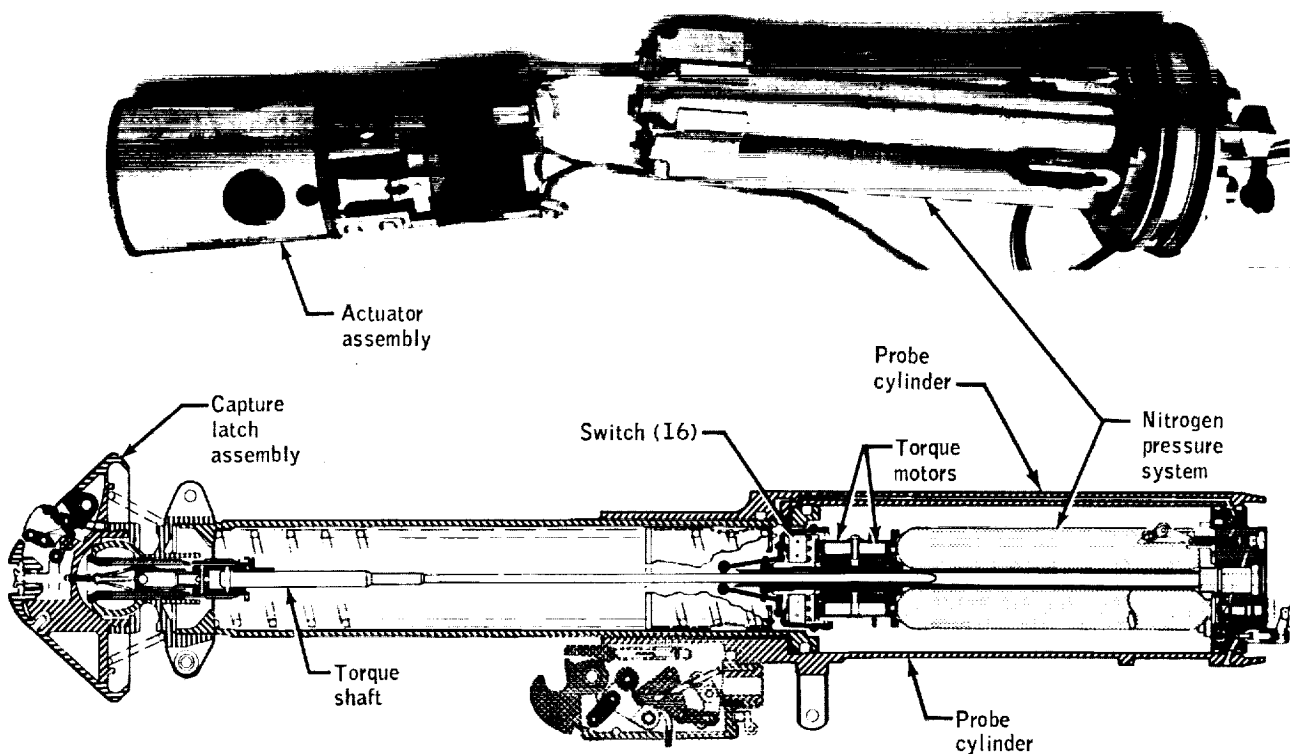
Cutaway of probe assembly in extended and cocked positions.
